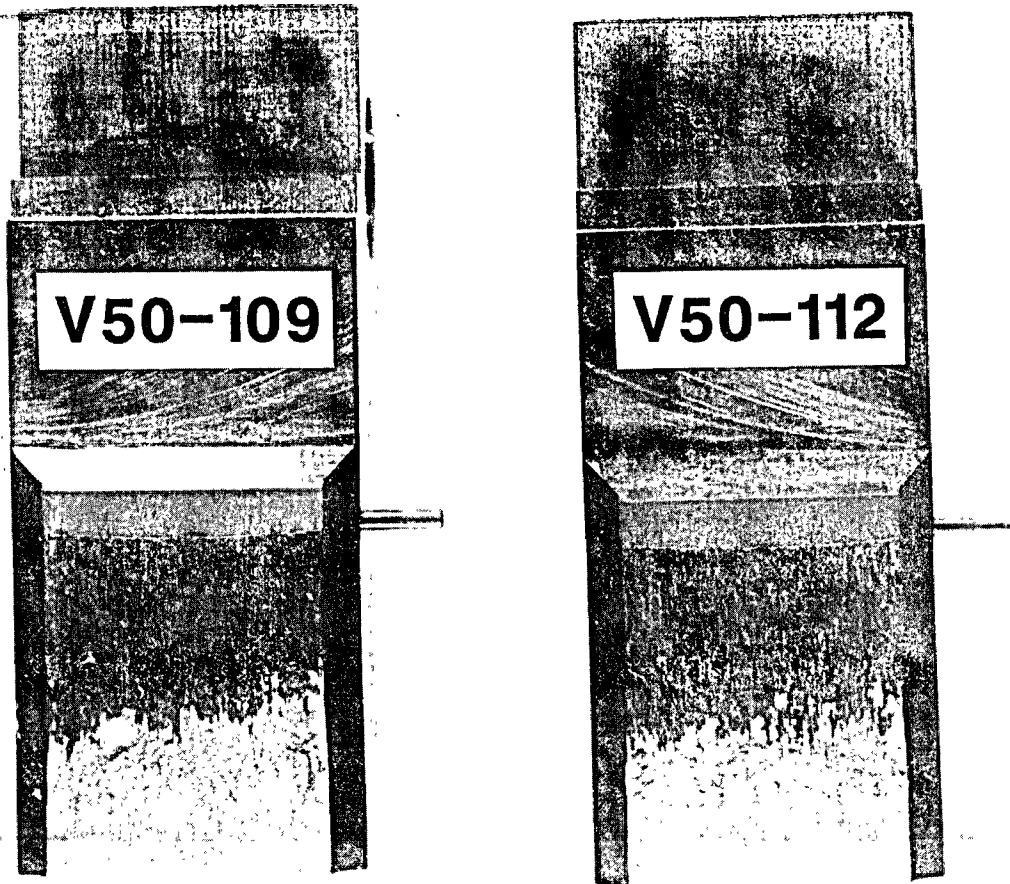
Fracture surfaces of the 1T-CT specimens.
